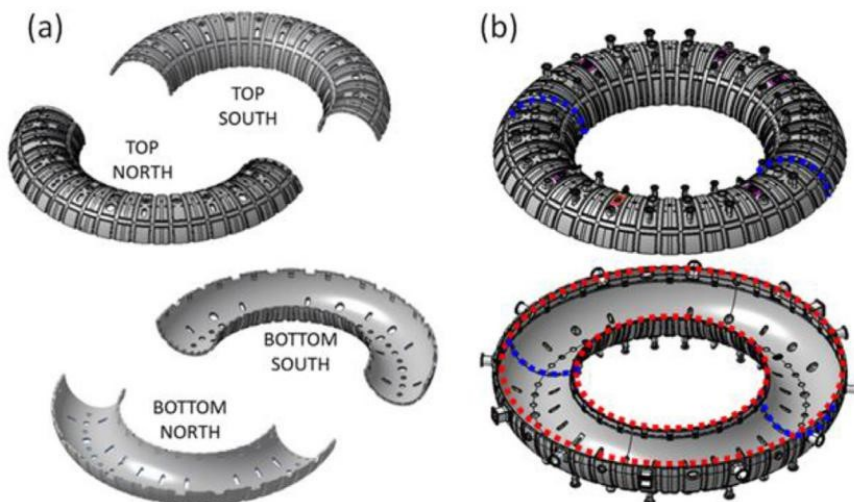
VTSS – mechanical support and vacuum vessel, (a) four parts exploded, (b) top/bottom halves exploded [21]
